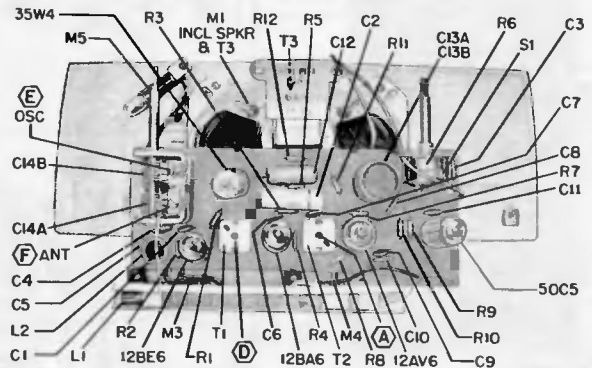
Top View of 5D4 Chassis Showing Location of Components and Alignment Points.
